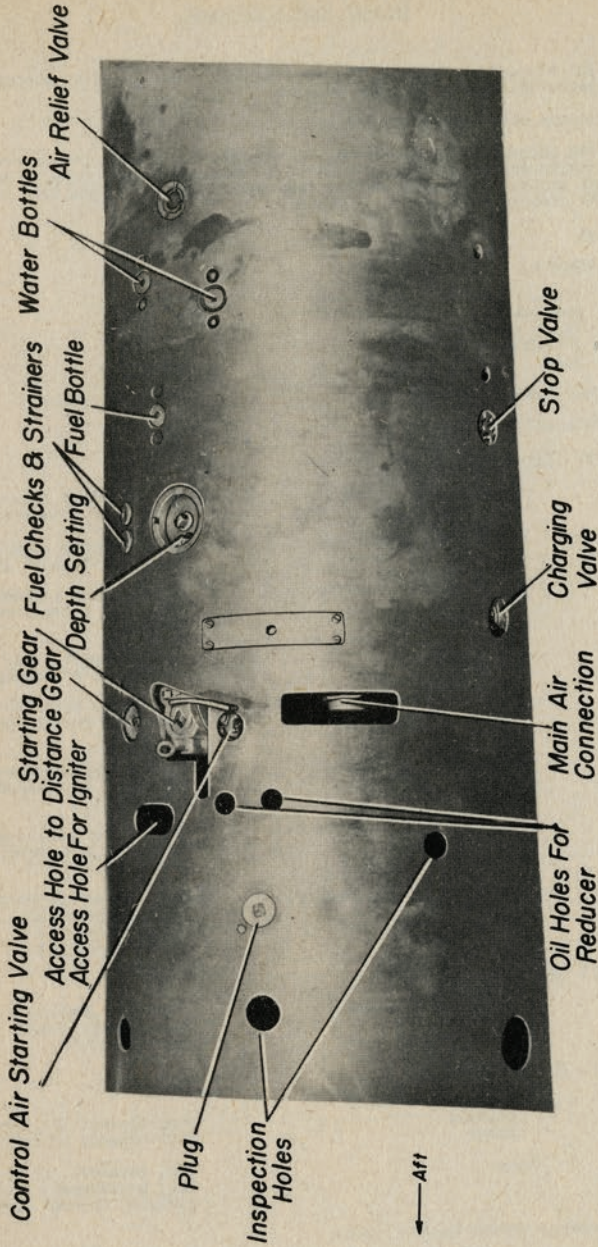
Torpedo Type 2 (Special), Flask Section, Top Starboard View
